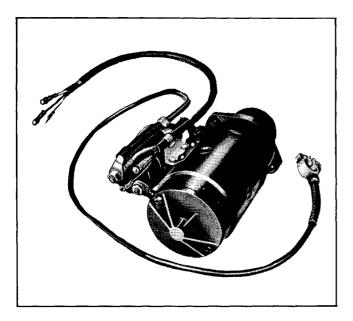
Proper Assembly of Wires and Cable to Solenoid
